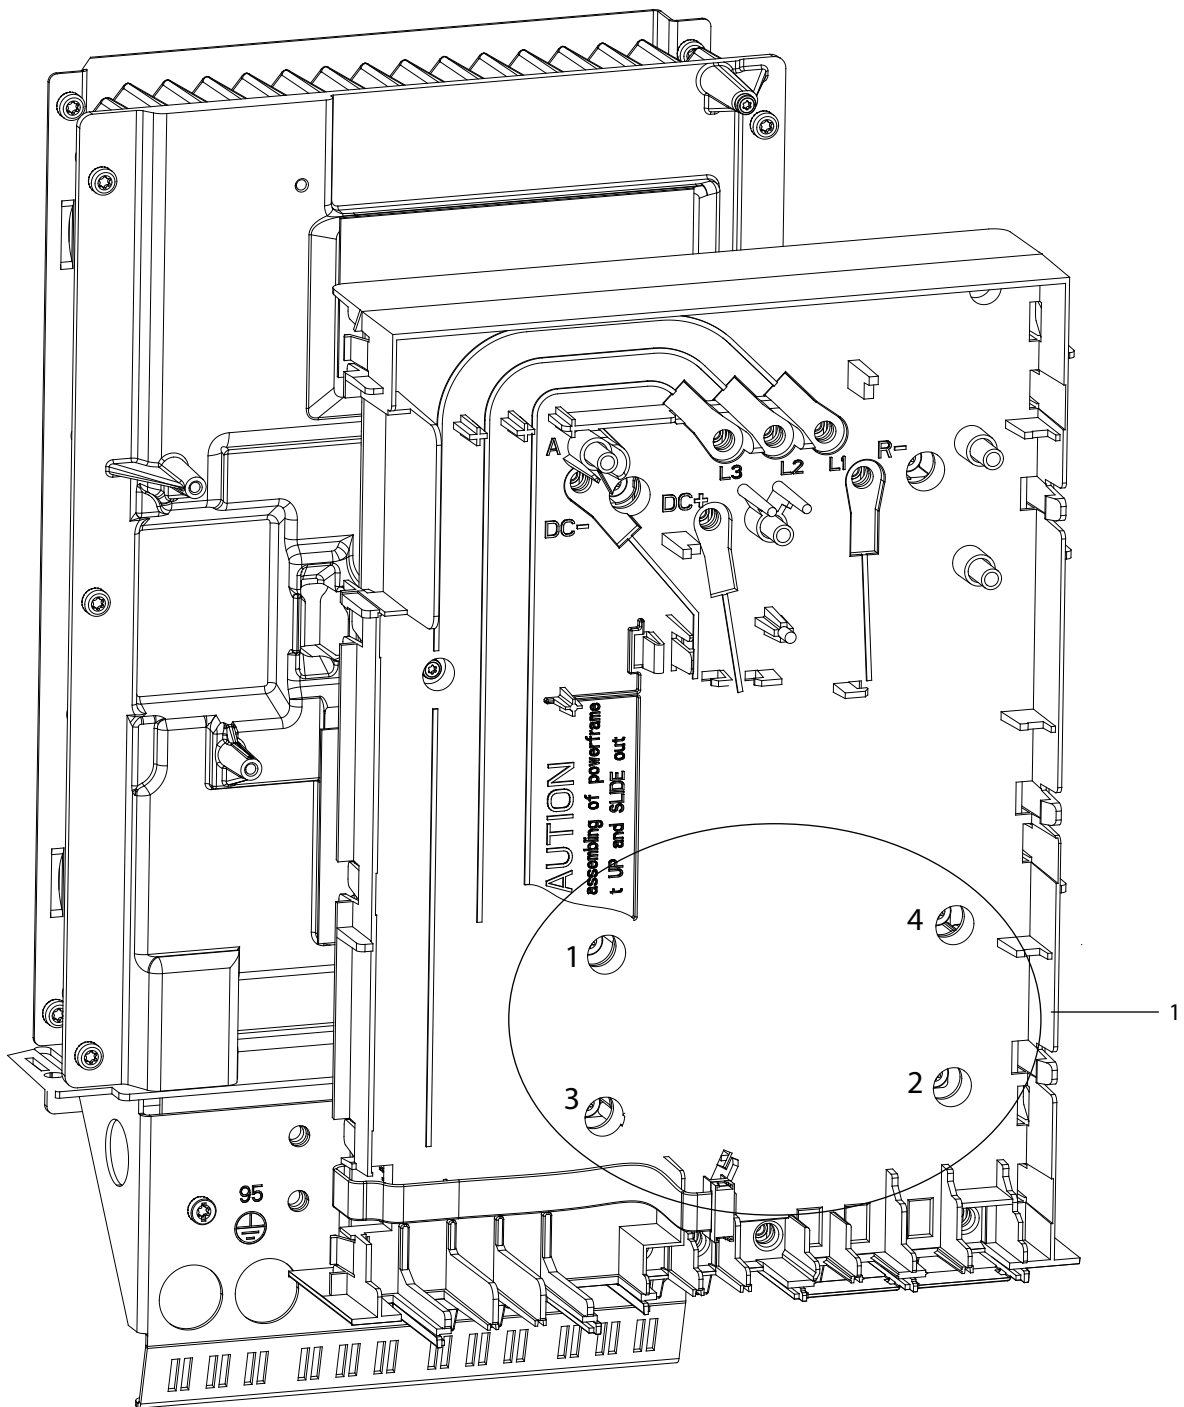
Tightening Sequence for the IGBT Fasteners
